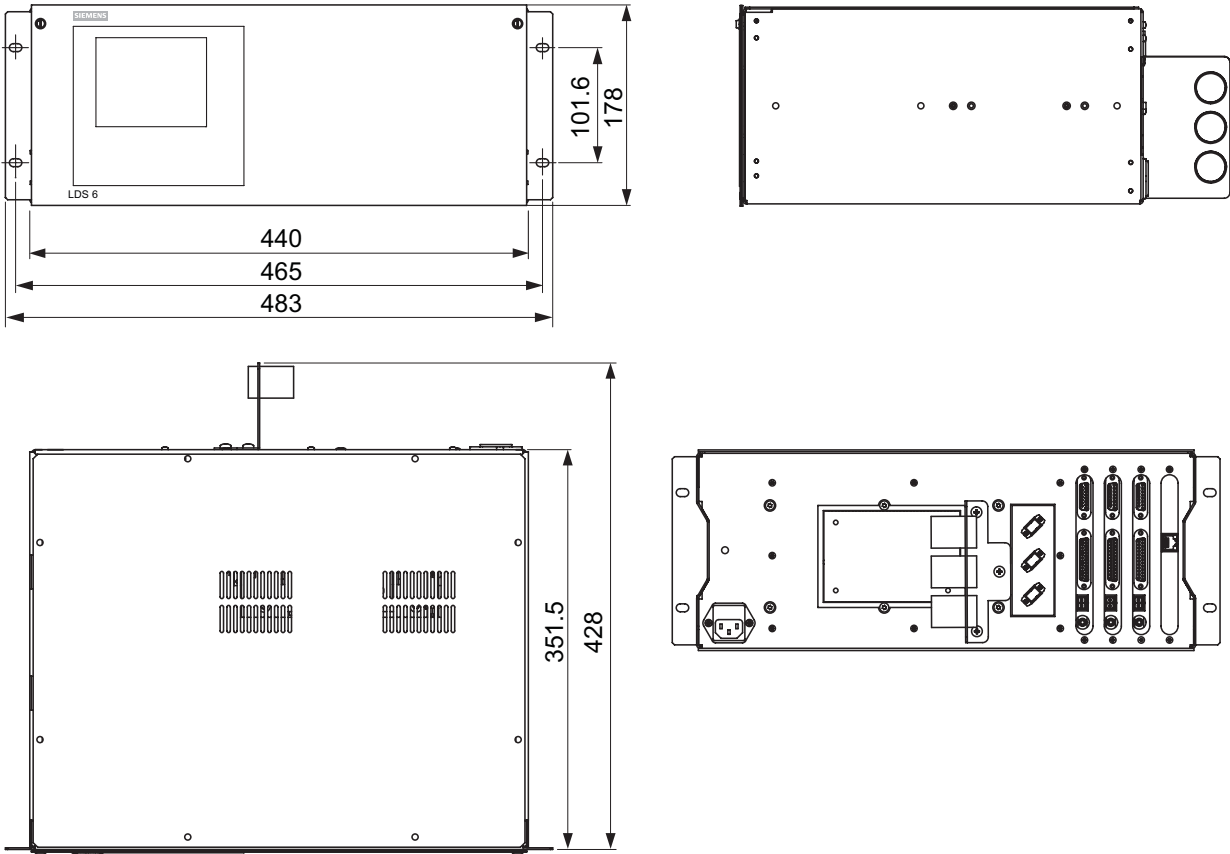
Dimensional drawings of the central unit – LDS 6
